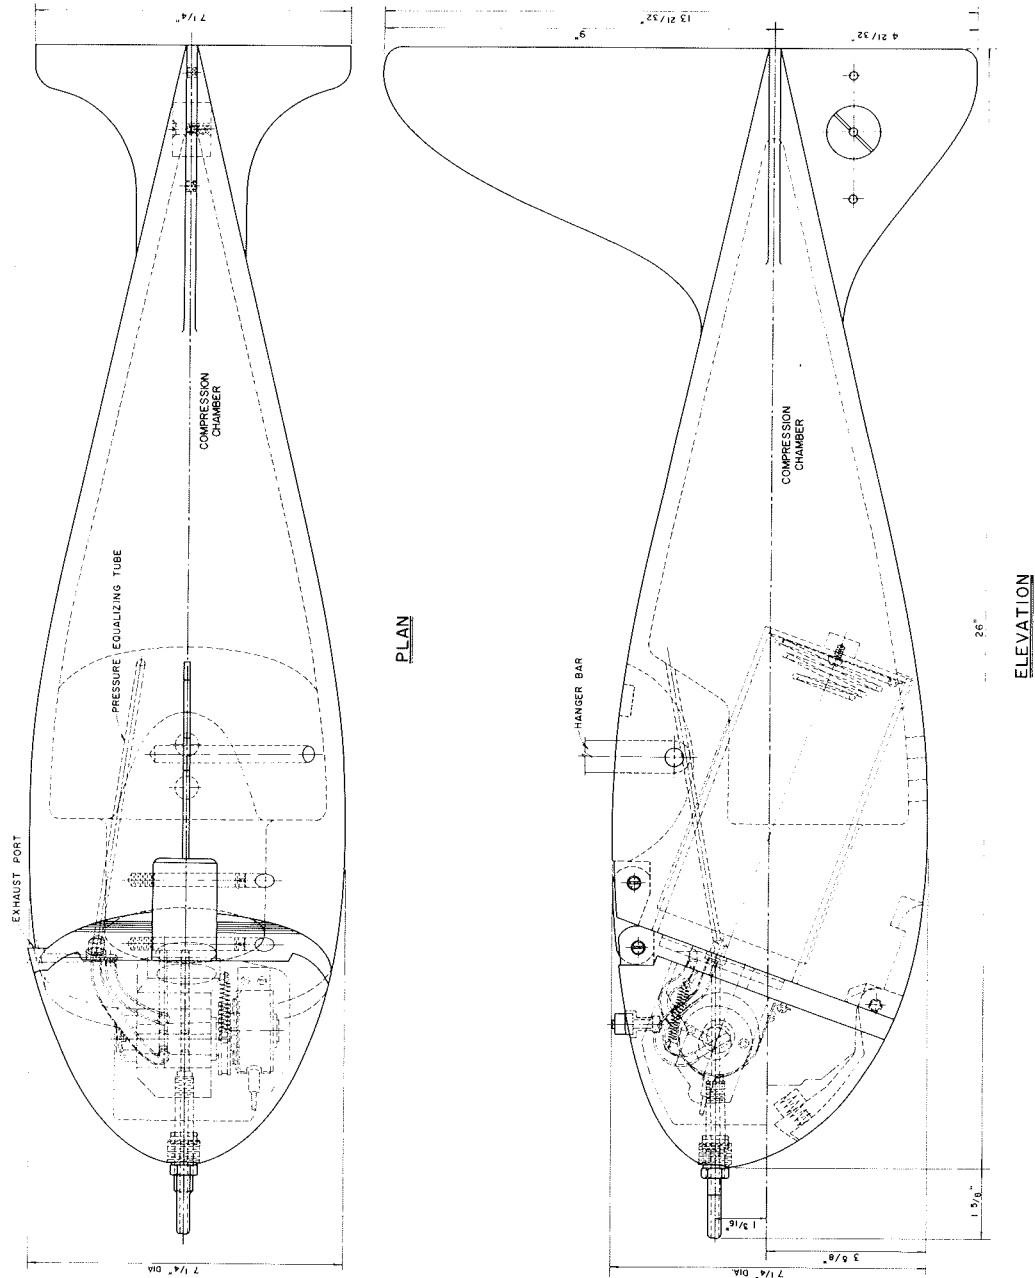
POINT-INTEGRATING SAMPLER, US P-46 R
